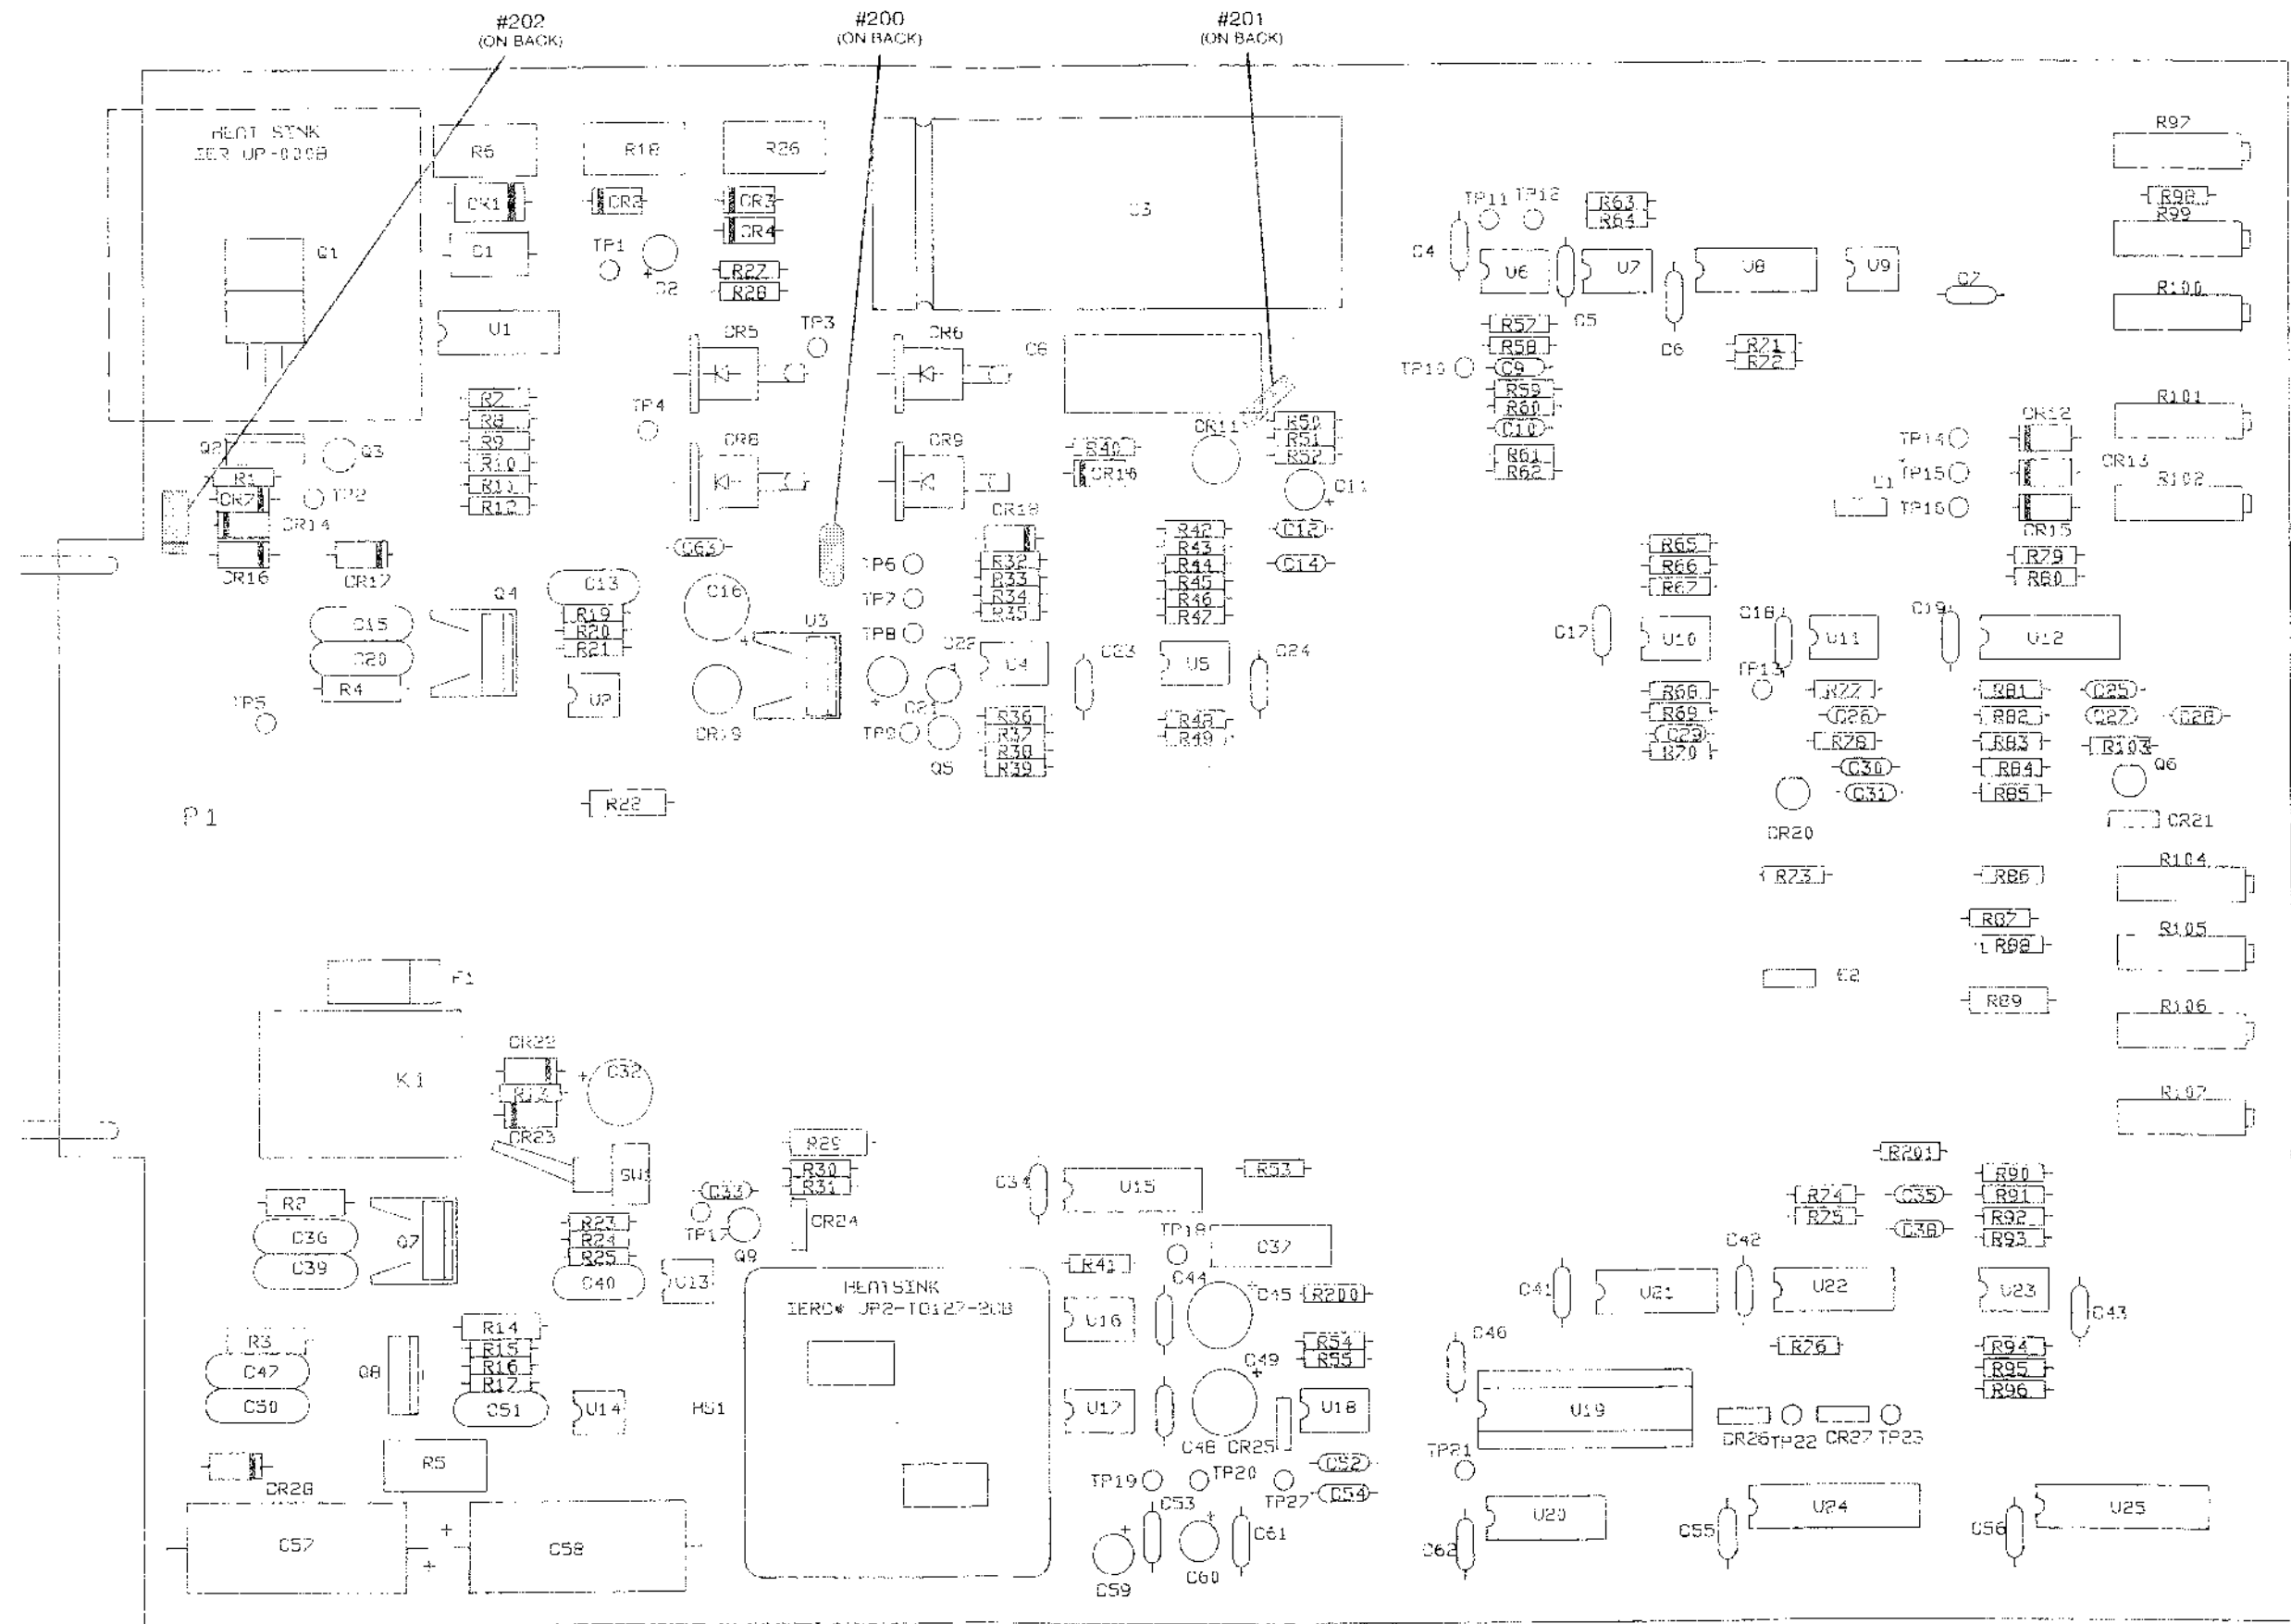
Component Location, Controller Printed Circuit Board, PN 74095-0
